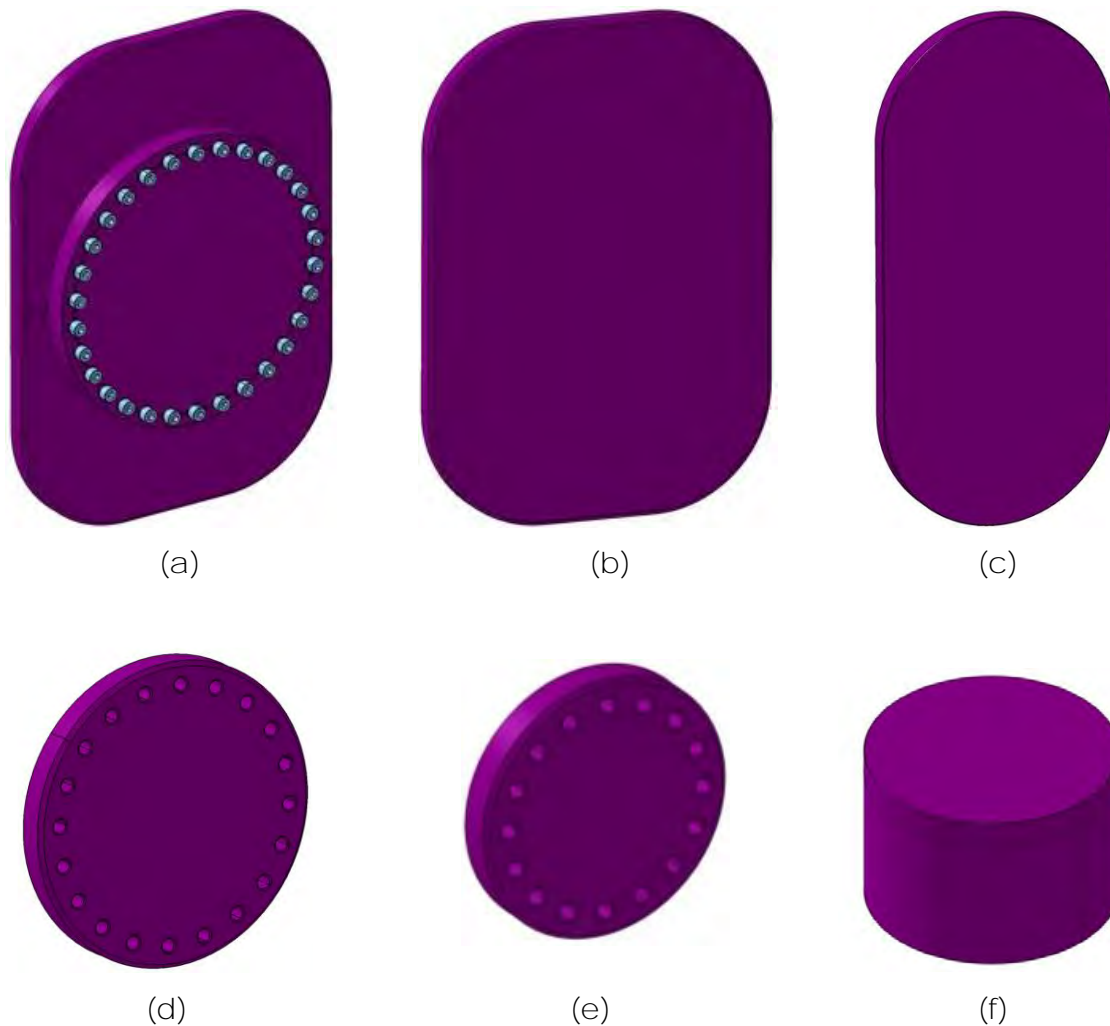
All six types of blank flanges; (a) MX port with additional CF flange; (b) MX port simple flange; (c) MN port flange; (d) Divertor port flange; (e) Vertical port flange; (f) Divertor port flange – for elevated temperature operation
